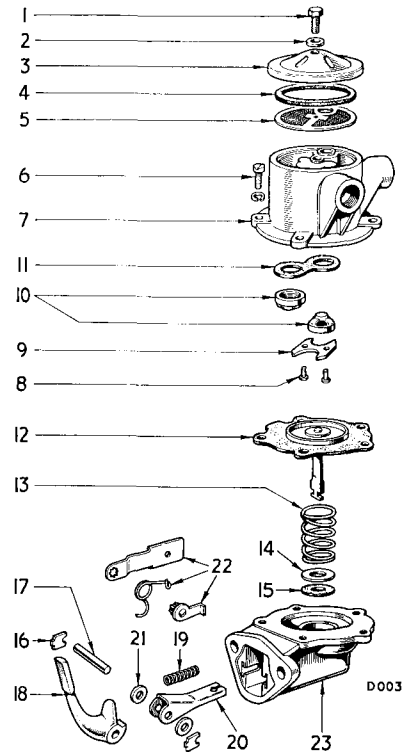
Exploded view of Spitfire and Herald 1200, 12/50 fuel pump
